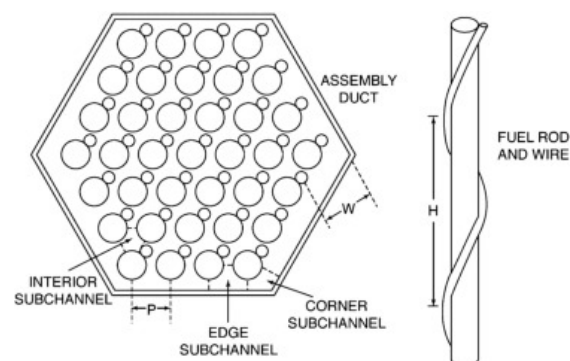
Assembly duct and with wire-wrapped fuel rod. [54]
